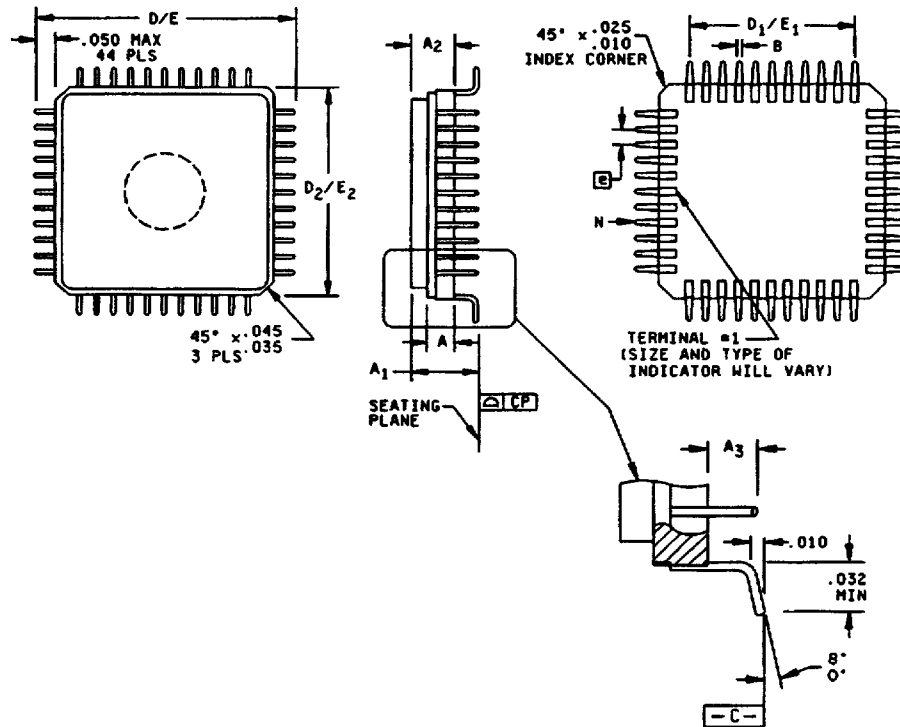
Ceramic chip carrier, gull wing leaded package.
